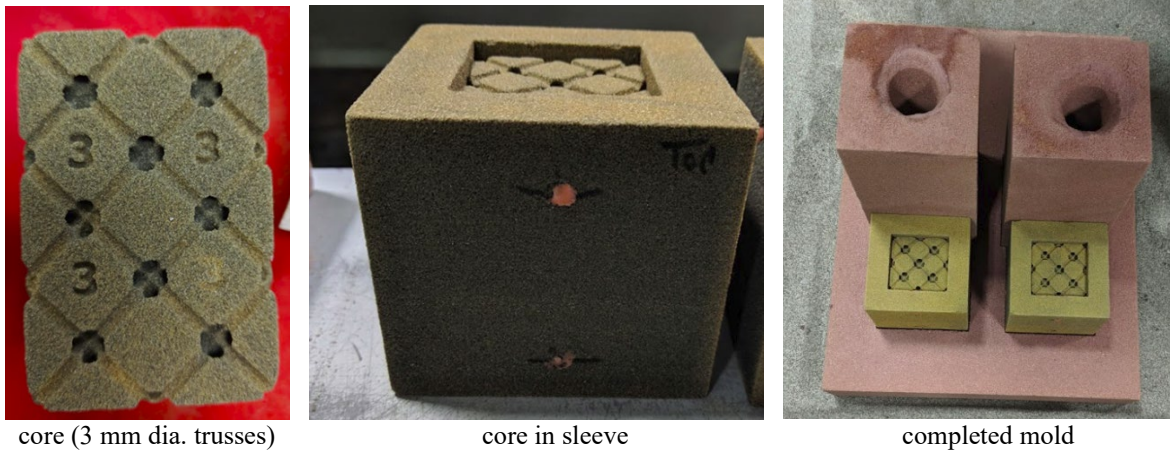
3D printed mold design for small, 50 mm x 50 mm x 75 mm, lattice structures for compression testing. The “completed” mold is missing the lattice sleeve covers.
